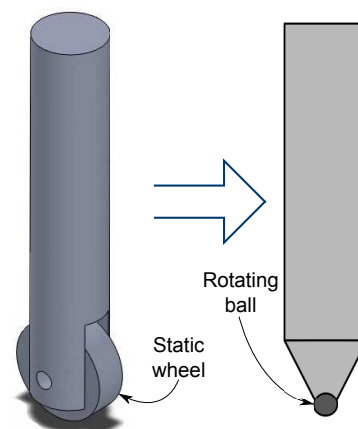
Modified tool which replaces the static wheel with a rotating ball.
